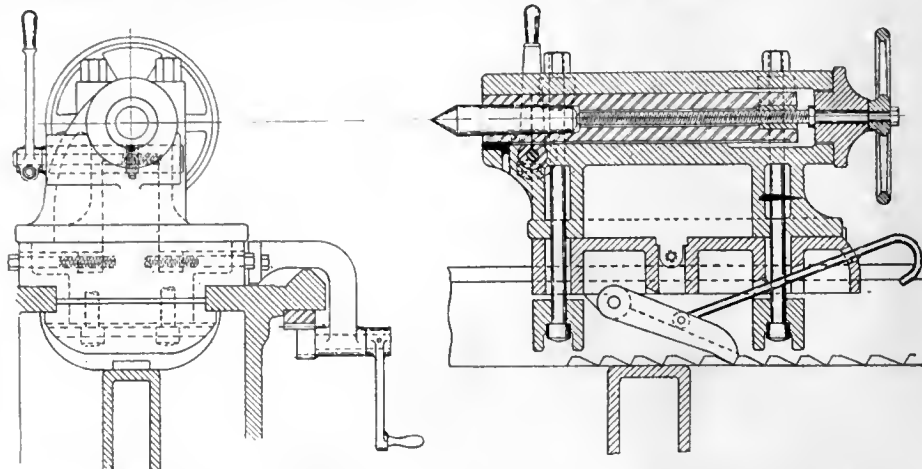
FOUR BOLT TAILSTOCK WITH SPRAG AND HAND TRAVERSING GEAR.
